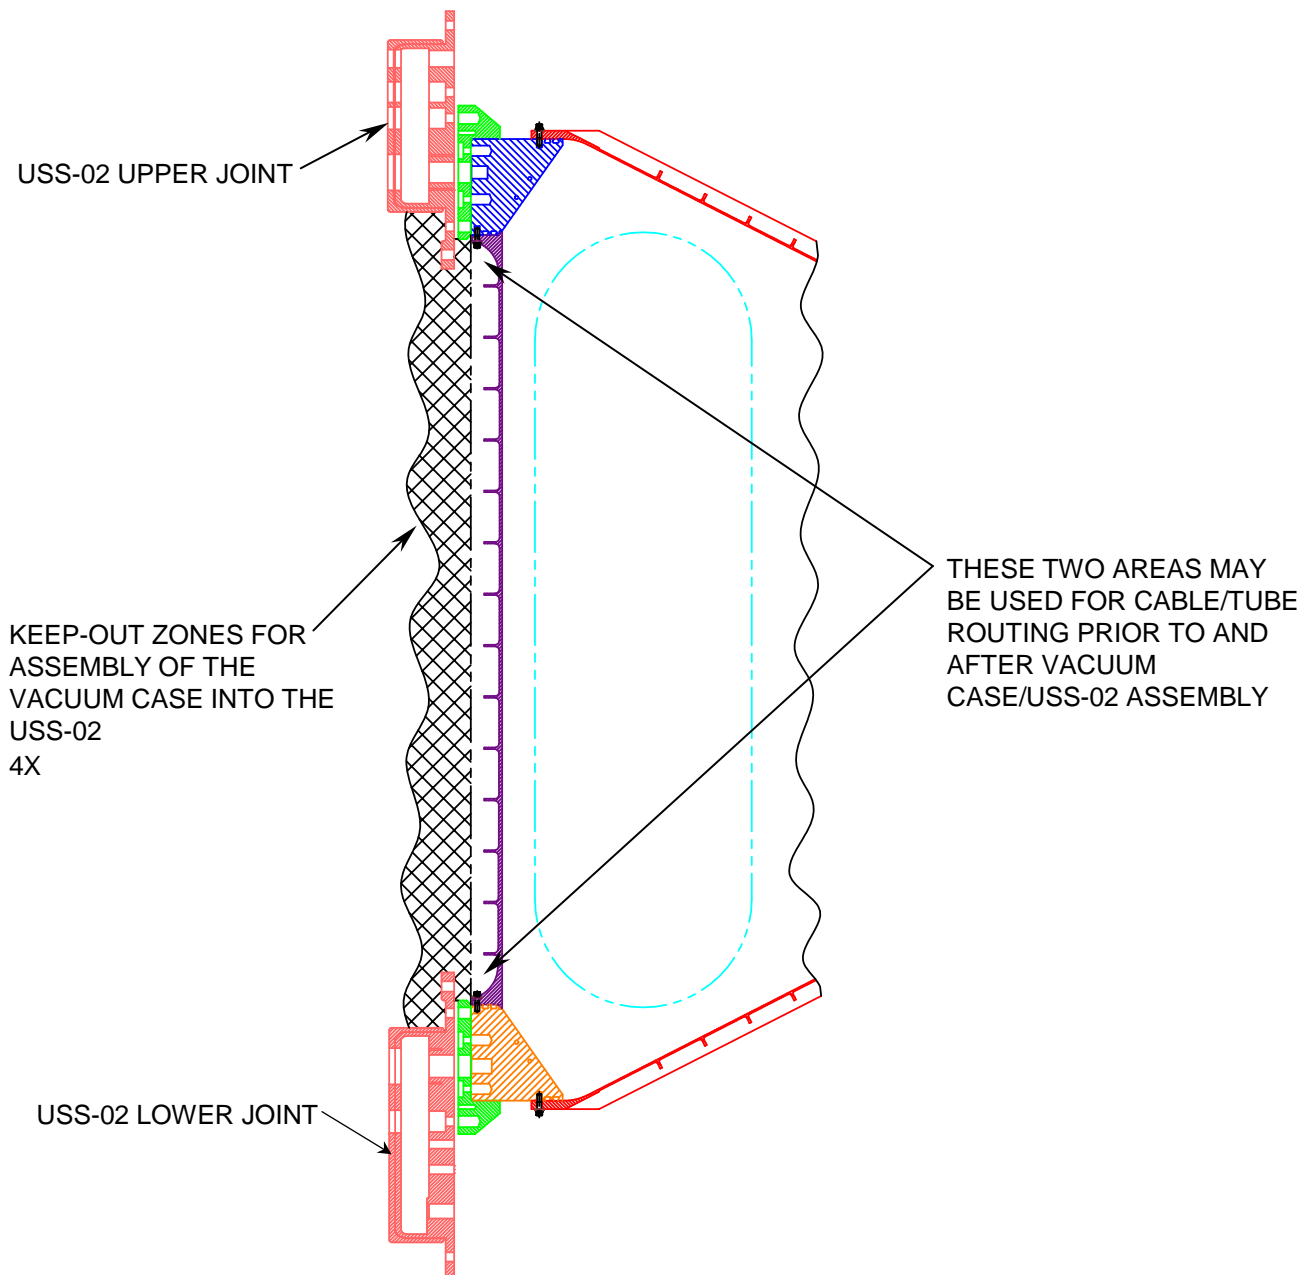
Section View of Keep Out Zone for the VC/USS-02 Assembly
